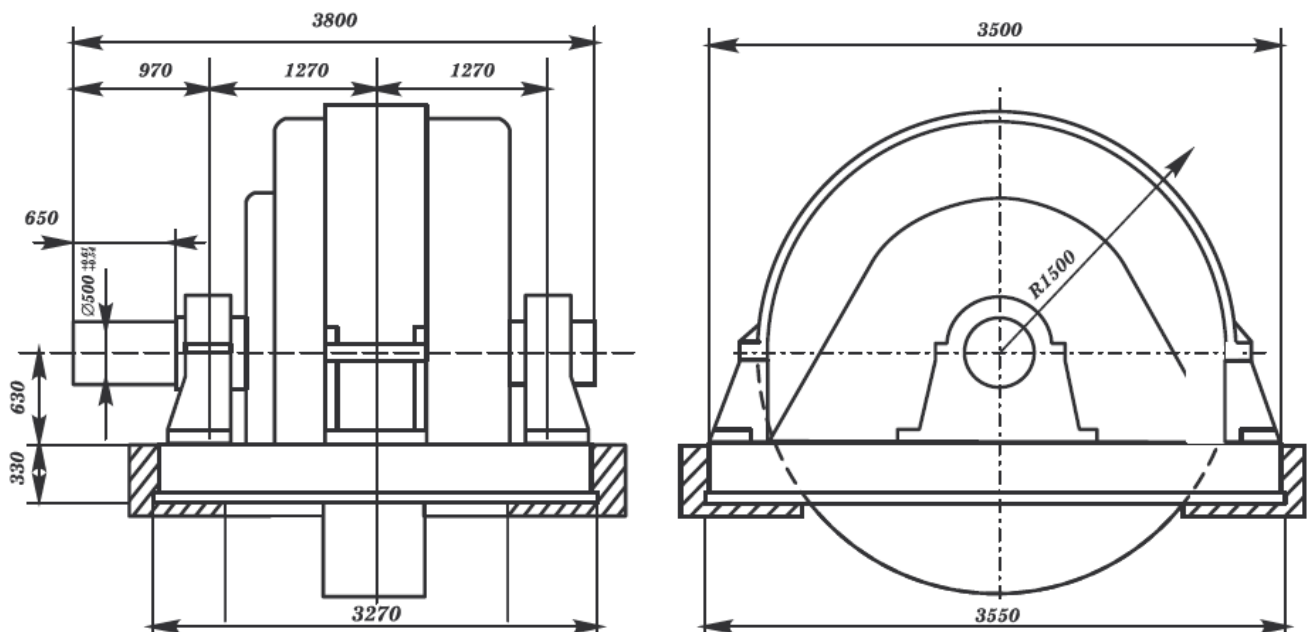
Overall and mounting dimensions of the motor P2-630-204,5-4K.
